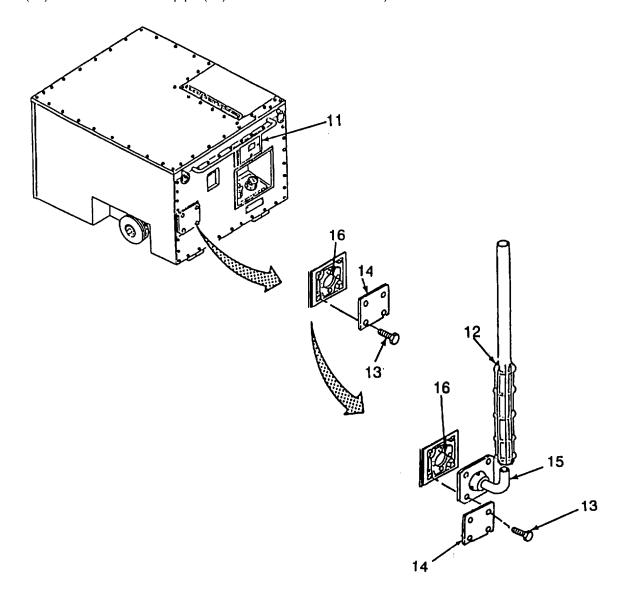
Assembly of Equipment (Sheet 2 of 2)
